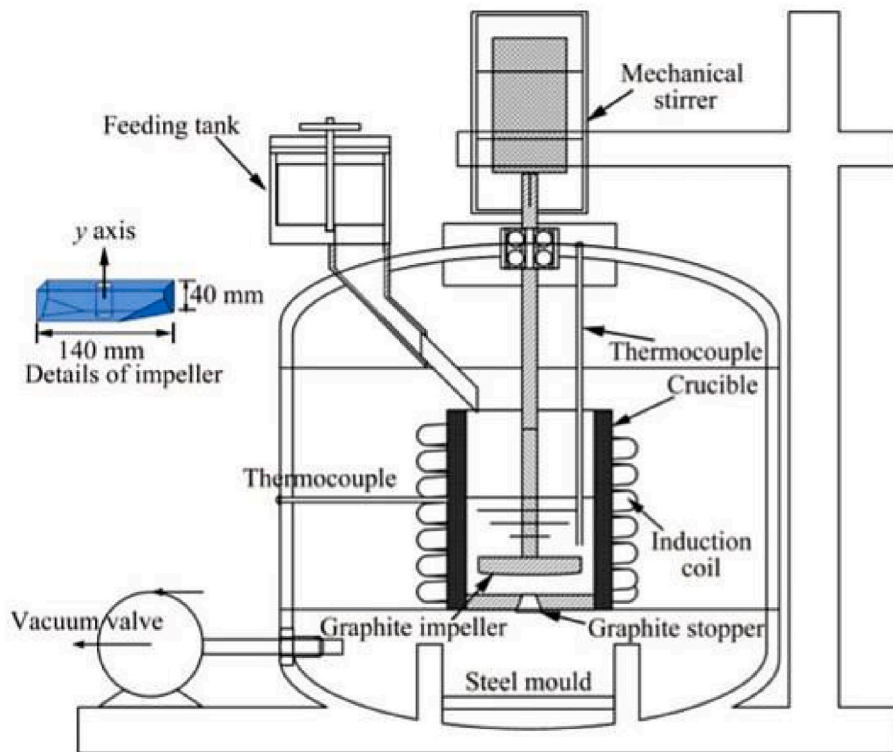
Schematic diagram of stir vacuum casting setup [93]
